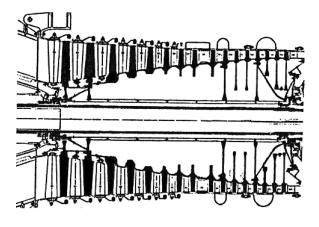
$\,$ GE TF39 ring drum compressor rotor design using, titanium and IN718 alloys.
